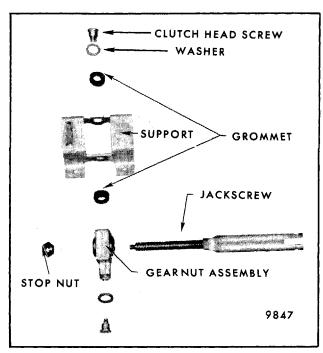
Power Reclining Seat Back Actuator - Disassembly and Assembly
